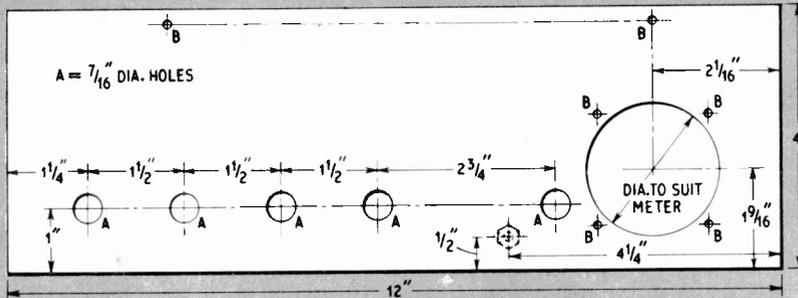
Front panel drilling details also in aluminium sheet. Do not cut the holes for the meter until this component has been obtained as the sizes will depend on the item chosen
